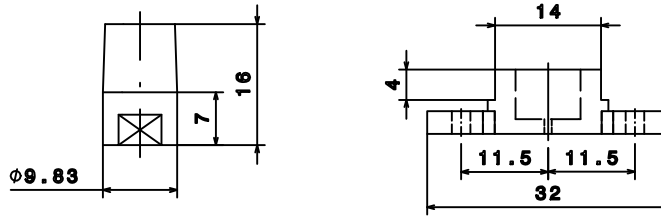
Technical drawing: front view. Bottom part (left), top part (right).
